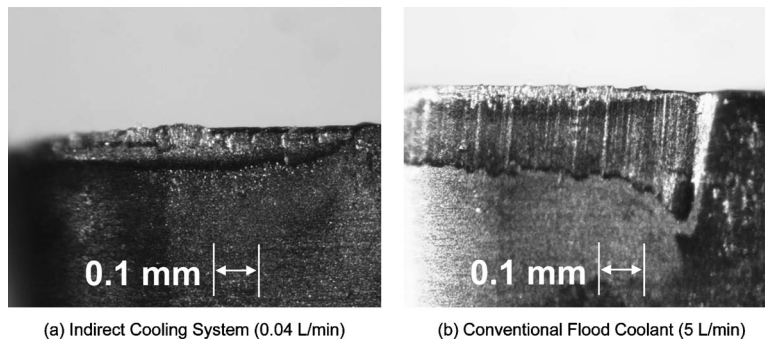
Photographs of the tool flank wear region for 416 stainless steel after 60 min of machining at a surface speed (cutting speed) of 100 m/min
